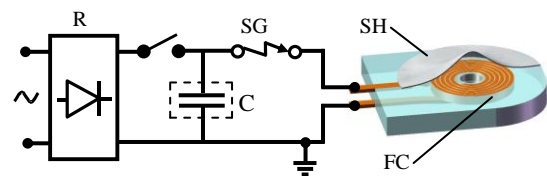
Main components of EMF system for metal sheets: R - rectifier; C - capacitor bank; SG - spark gap; FC - forming coil; SH - metal sheet
